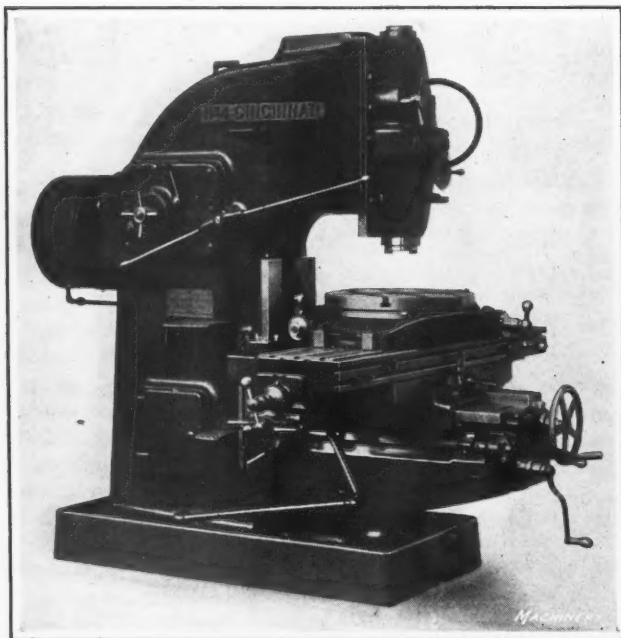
No. 4 Cincinnati High-power Vertical Milling Machine with Circular Milling Attachment
